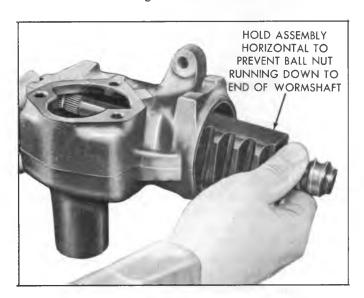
Removing the Wormshaft and Ball Nut-Typical
